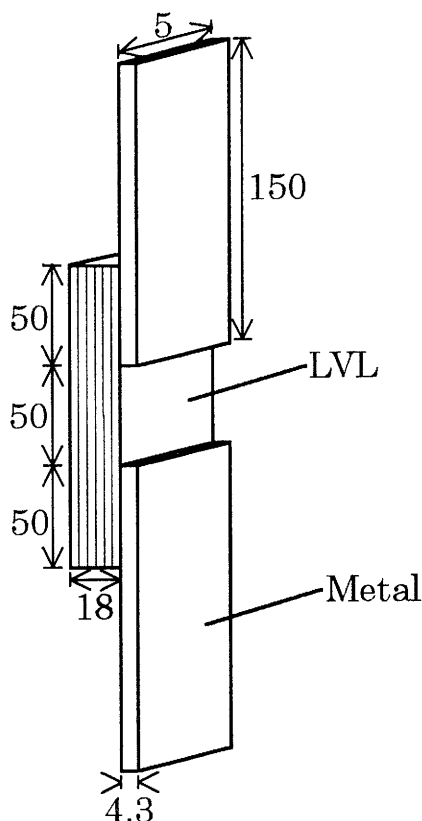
Dimensions of W single-lap specimen for adhesion tests (unit: mm).
